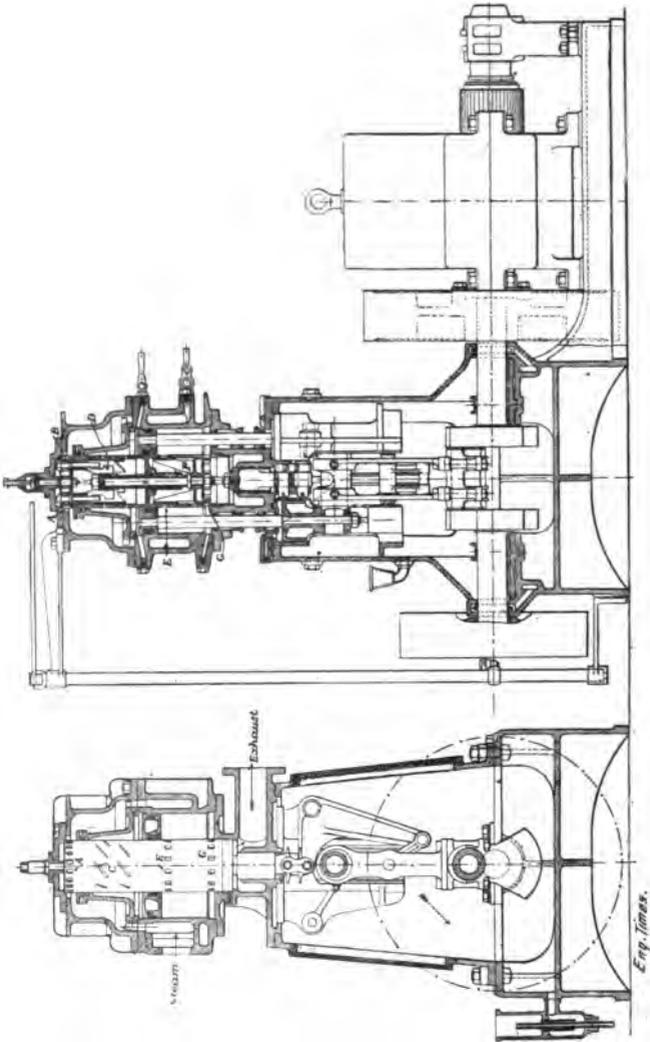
THE "SCOTT" CENTRAL VALVE ENGINE.
